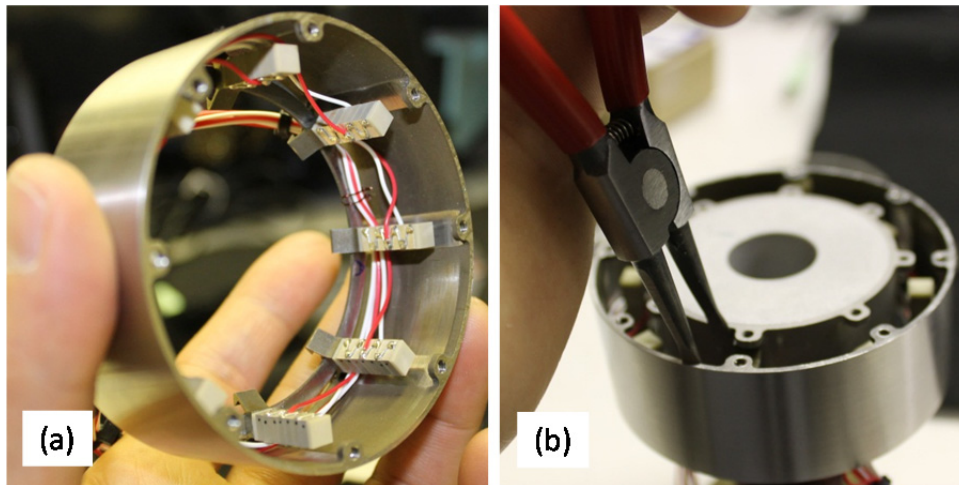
Con11b prototype. (a) Partial assembly, (b) Separating hoops to insert link.
